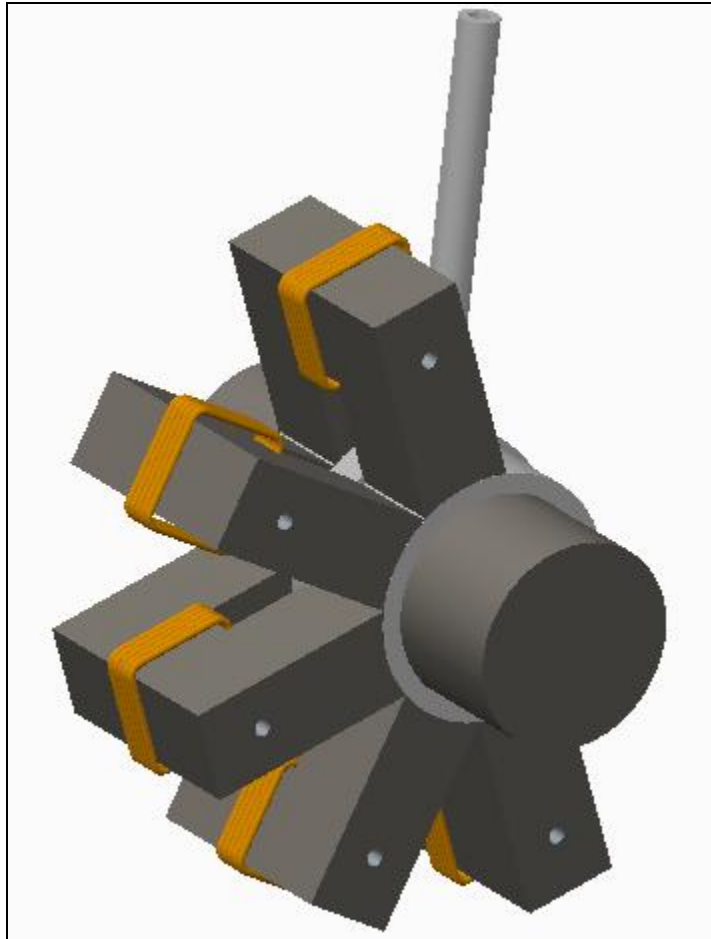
Removal of Electromagnets in Diverging Section of the Bearing
